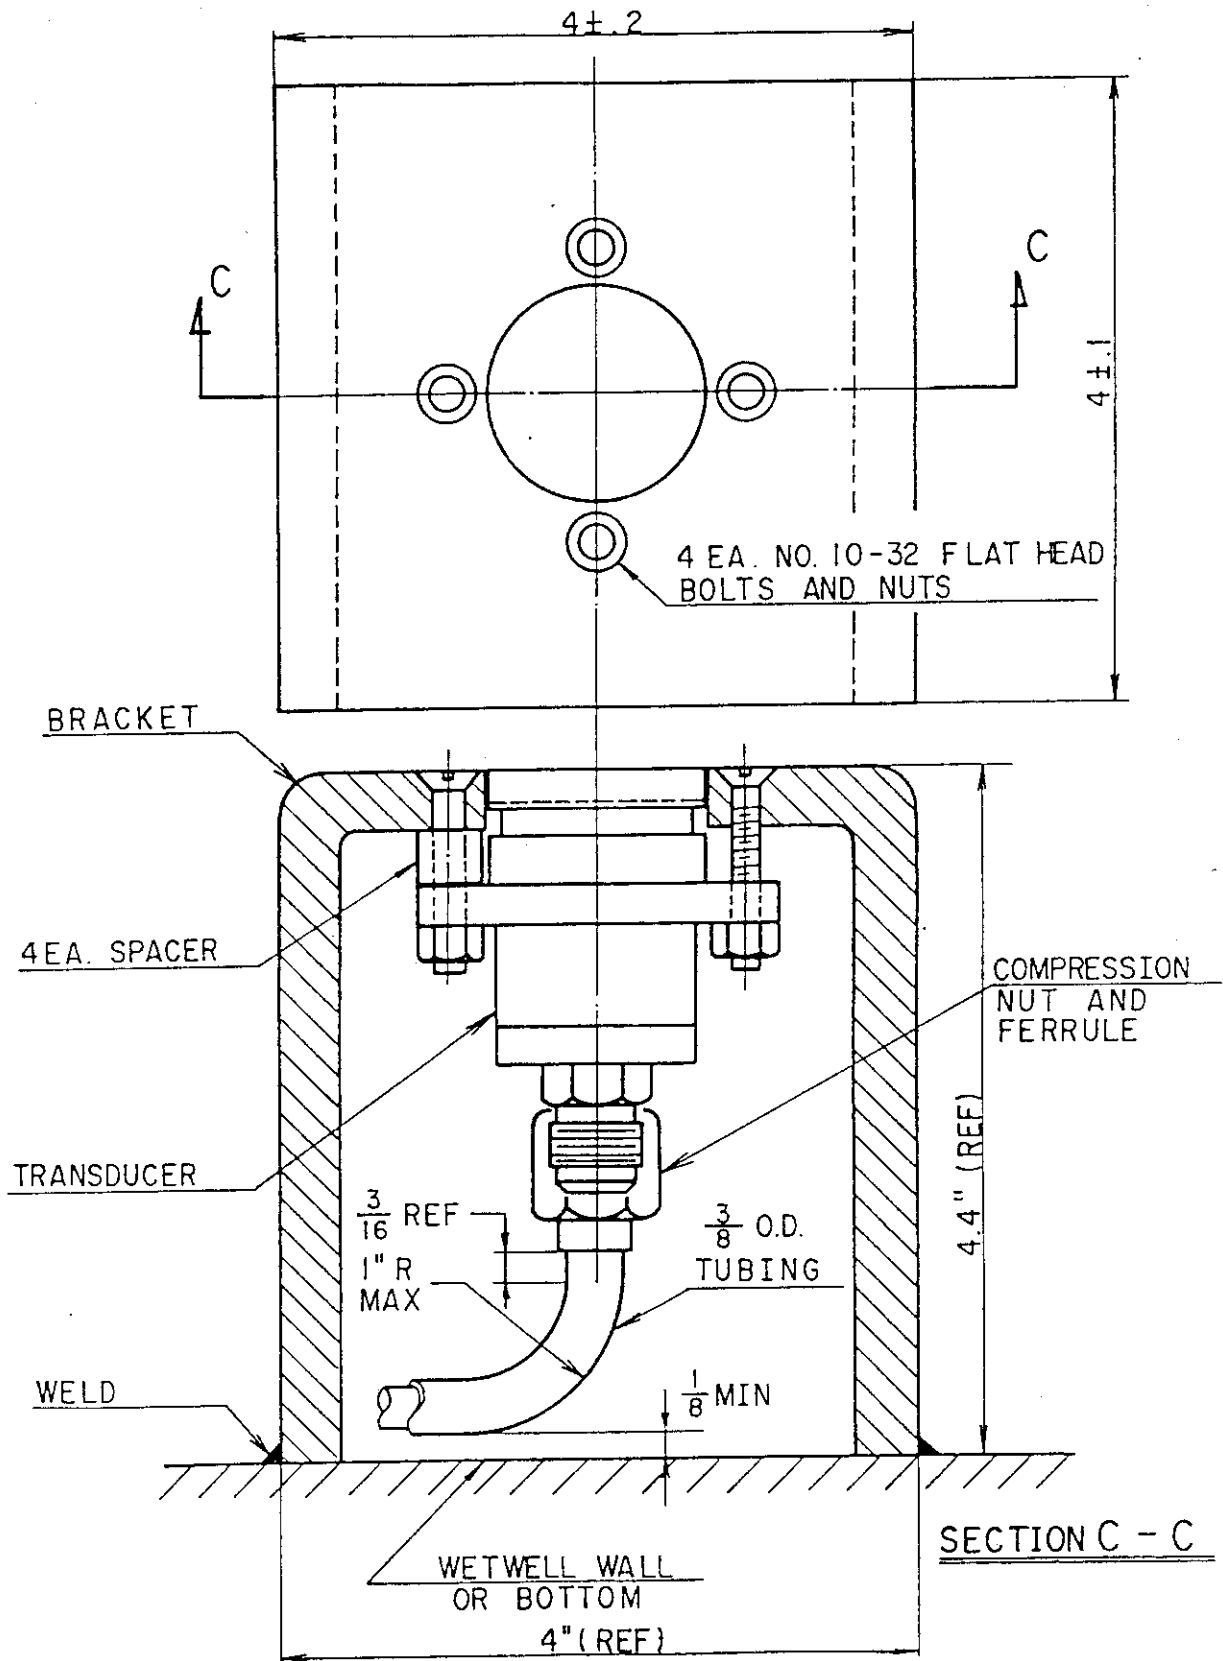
Schematic of installation of flush-diaphragm strain-gage type pressure transducers on wetwell bottom floor, wall, and shell
